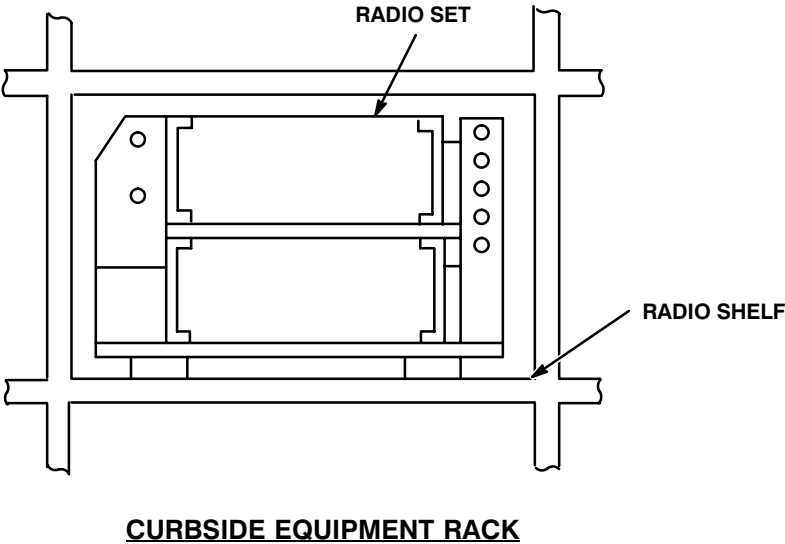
(2). MK and Radio Installation: Radio Equipment Locations
